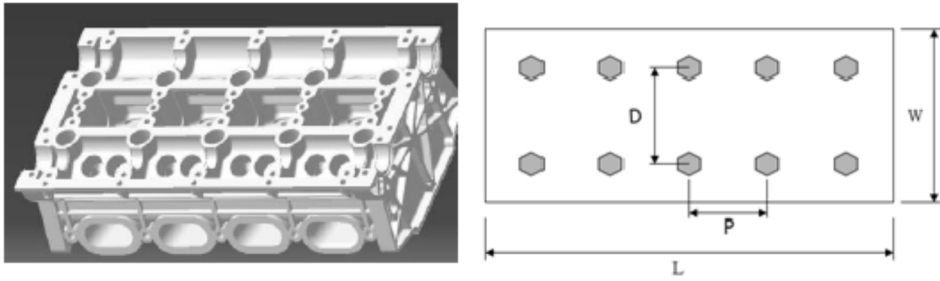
3D appearance and dimensions of a four-cylinder engine for study
